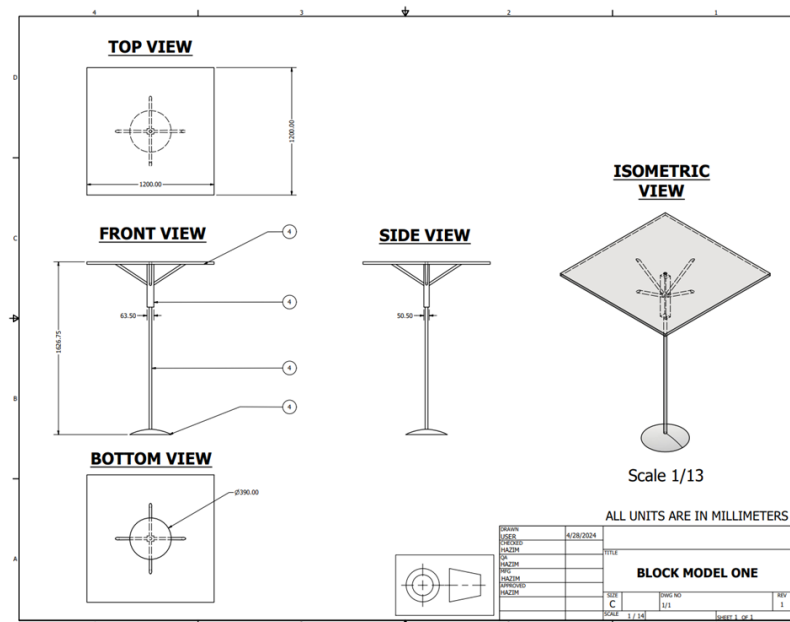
Early technical drawing of the mock 3D modelling DFED Umbrella
